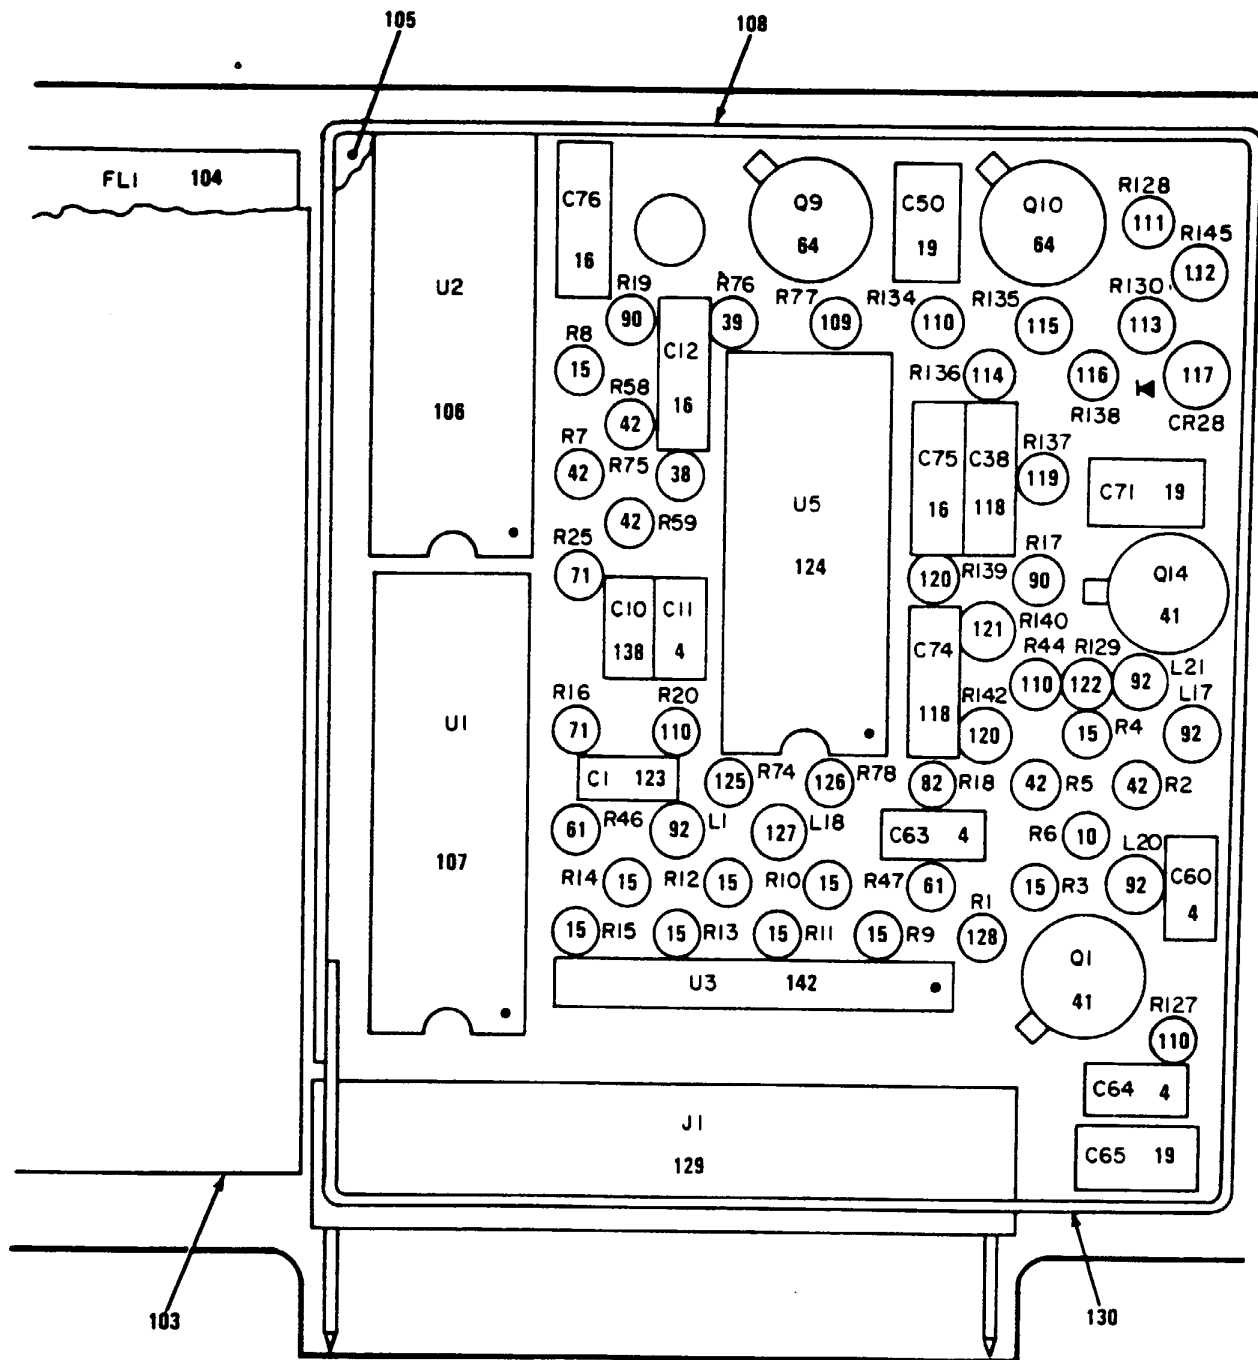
Synthesizer Circuit Card Assembly (Sheet 2 of 5)
